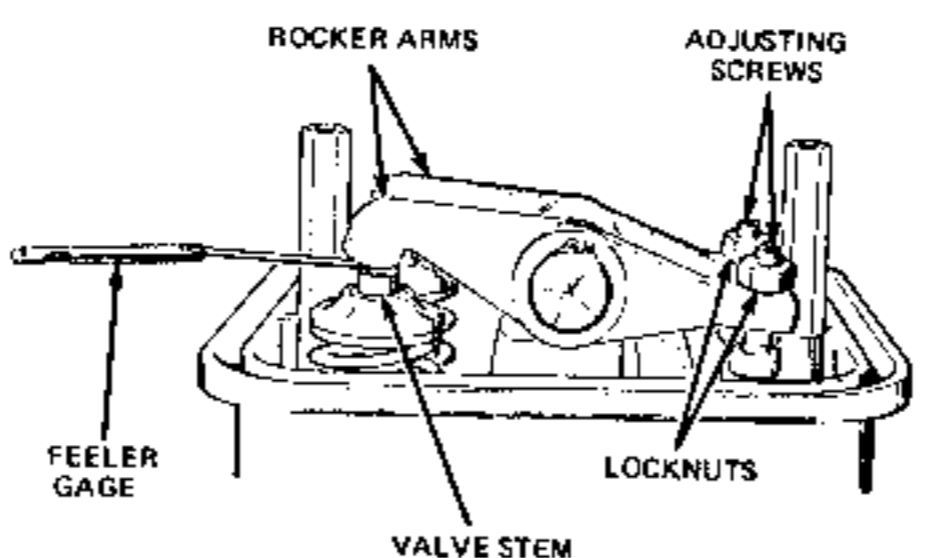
Use a feeler gage when adjusting valve clearance. Refer to text for adjustment procedure.
